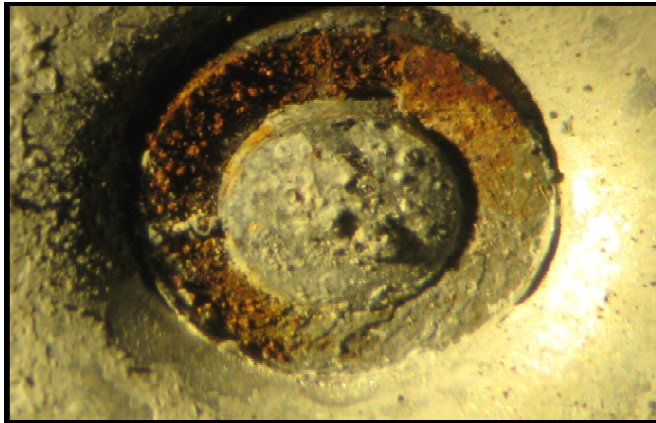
Rivet fracture surface, 5182 side, after corrosion treatment for 660 hrs
